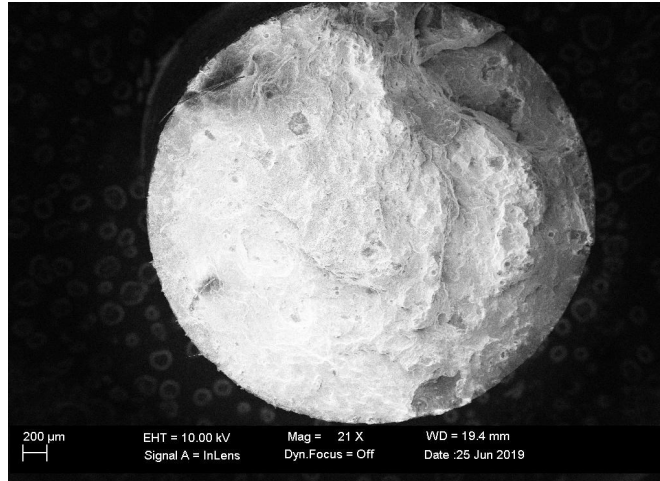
Control cylinder #3 fracture surface.
